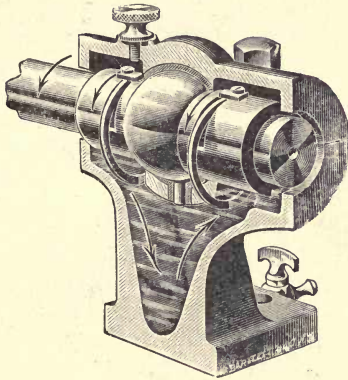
DETAIL OF SELF-OILING BEARING.
